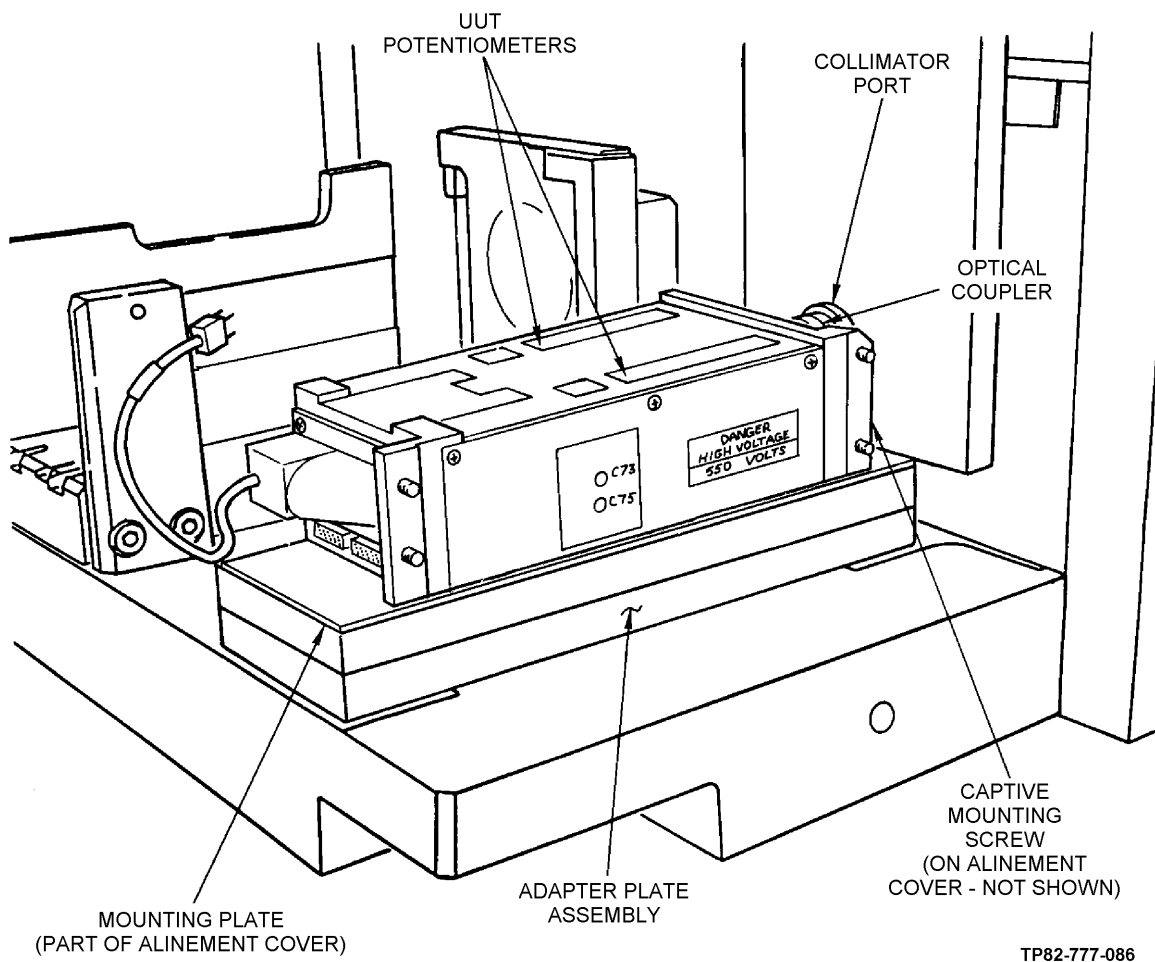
Multiplexer Mounting (Coarse Alinement)
